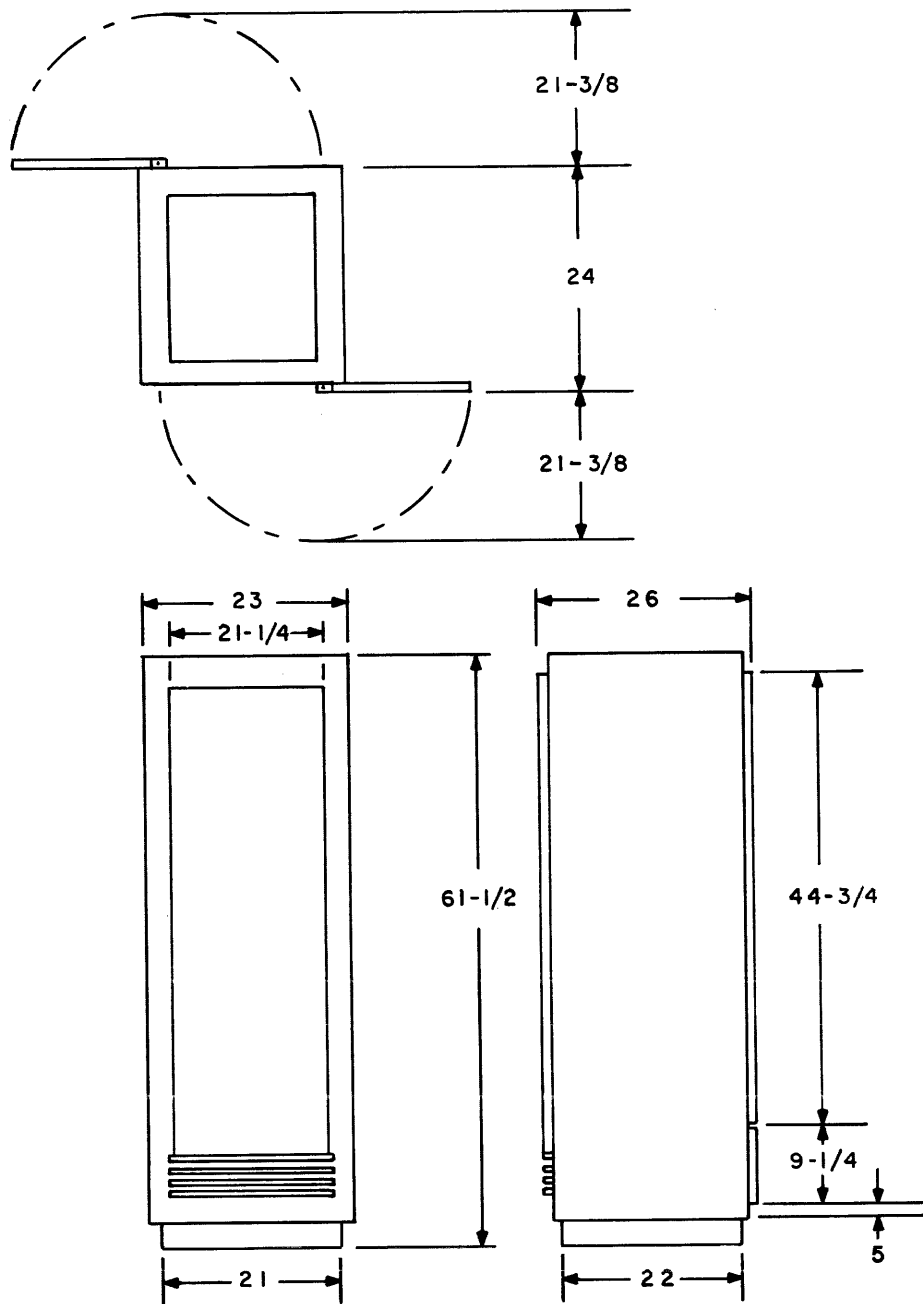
Auxiliary Equipment Cabinet Dimensions
